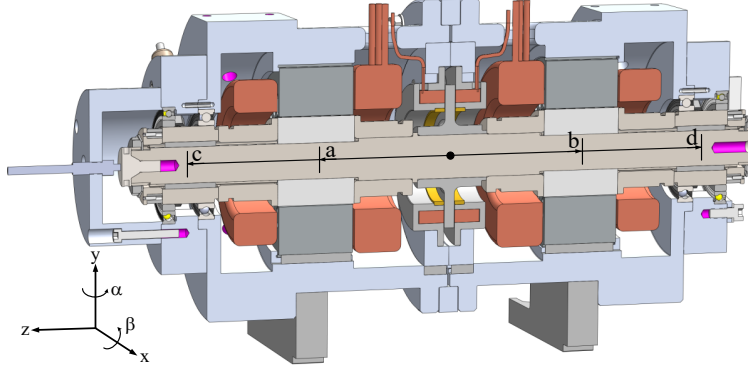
Cross-sectional view of the prototype machine, where the locations of the motor units (a, b) and the rotor position measurement planes (c, d) are illustrated from the center of mass.
